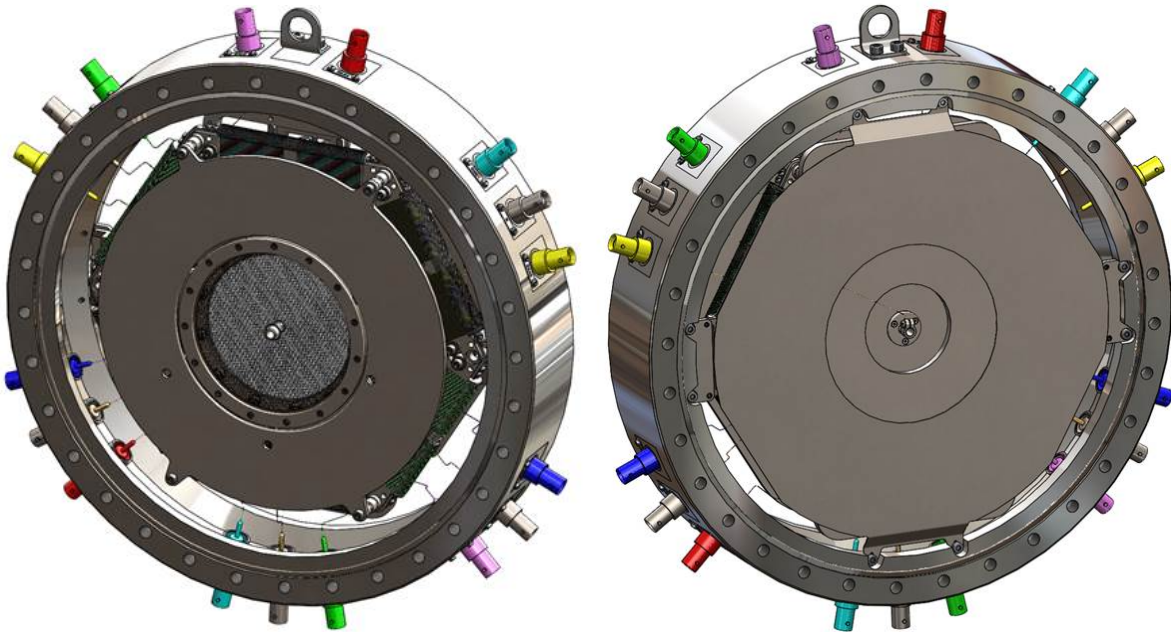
Overall view on hexanode REMI detector. (left) front side with grid and MCP. (right) rear side with shielding and electric connection for detector tube.
